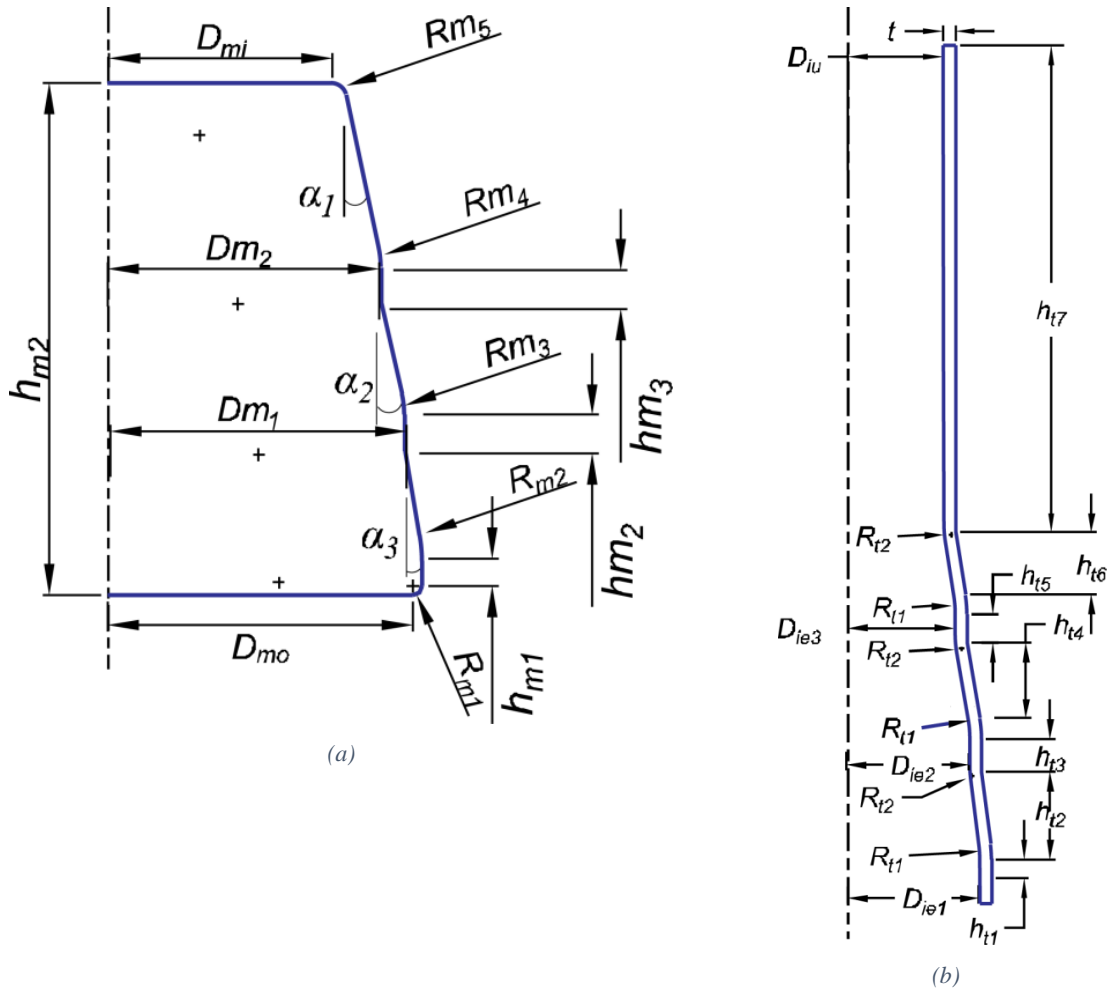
Geometrical dimensions: a) mandrel ; b) tubular
